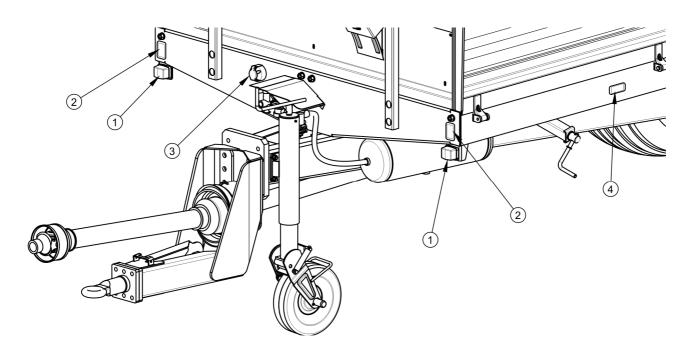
Positioning of electrical system components and reflectors – front view
